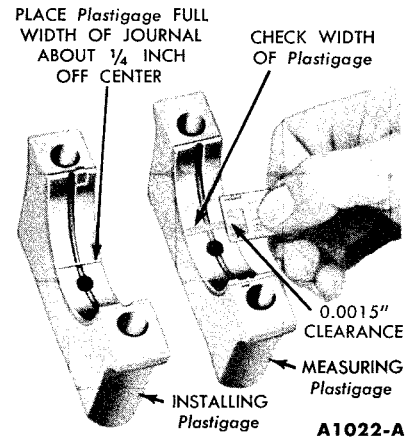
Installing and Measuring Plastigage—Engine Installed
